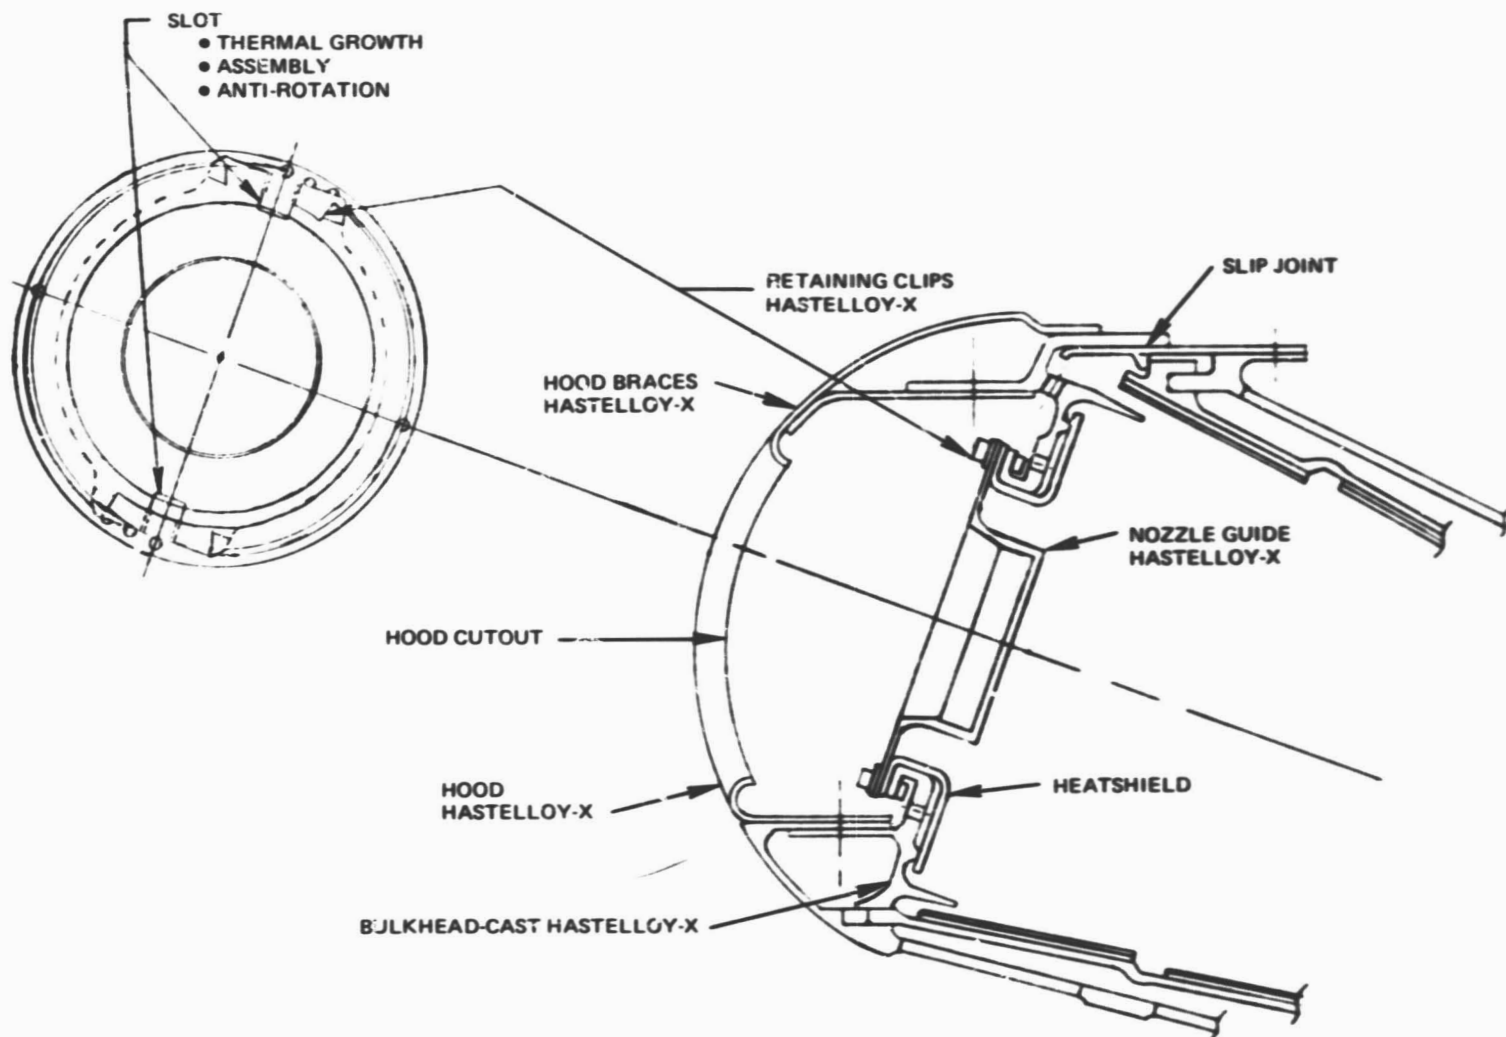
Combustor Front End. Cross section includes definition of design features and material.
